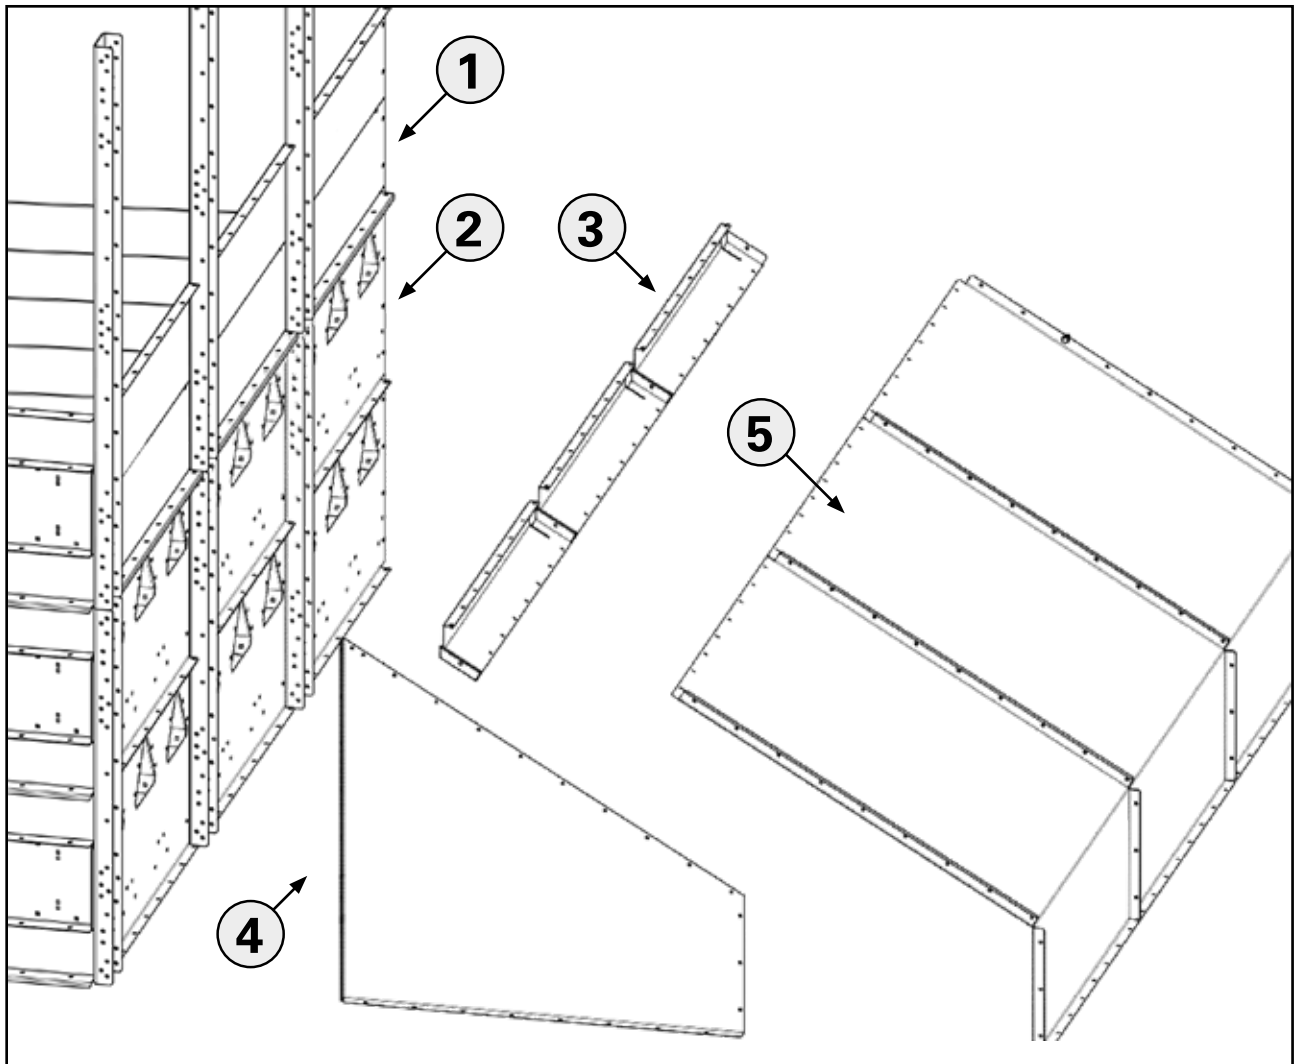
Exploded view of the heavy model drying cell with top air casing
